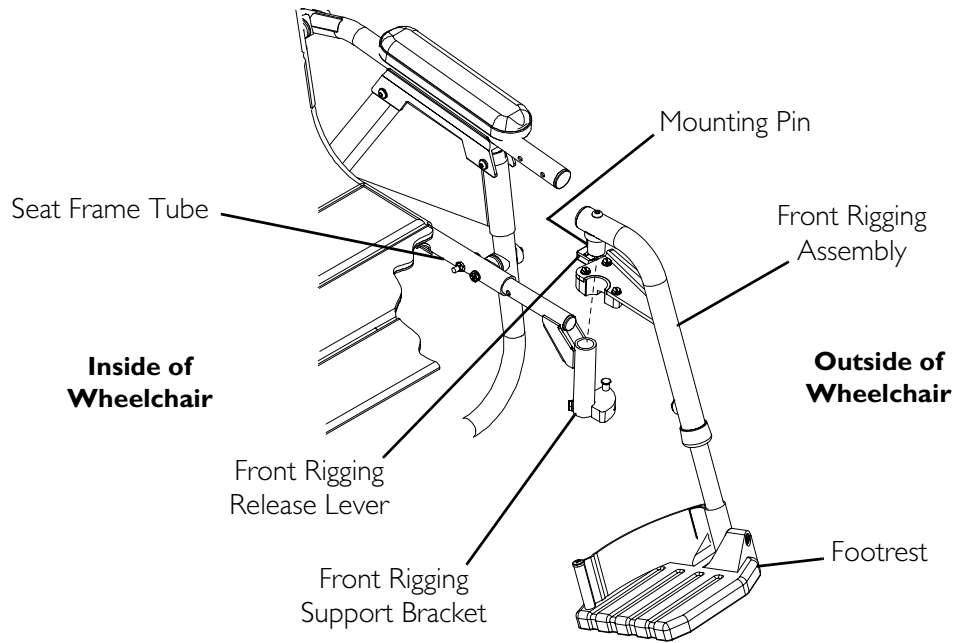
Installing/Removing the Front Rigging Assembly
